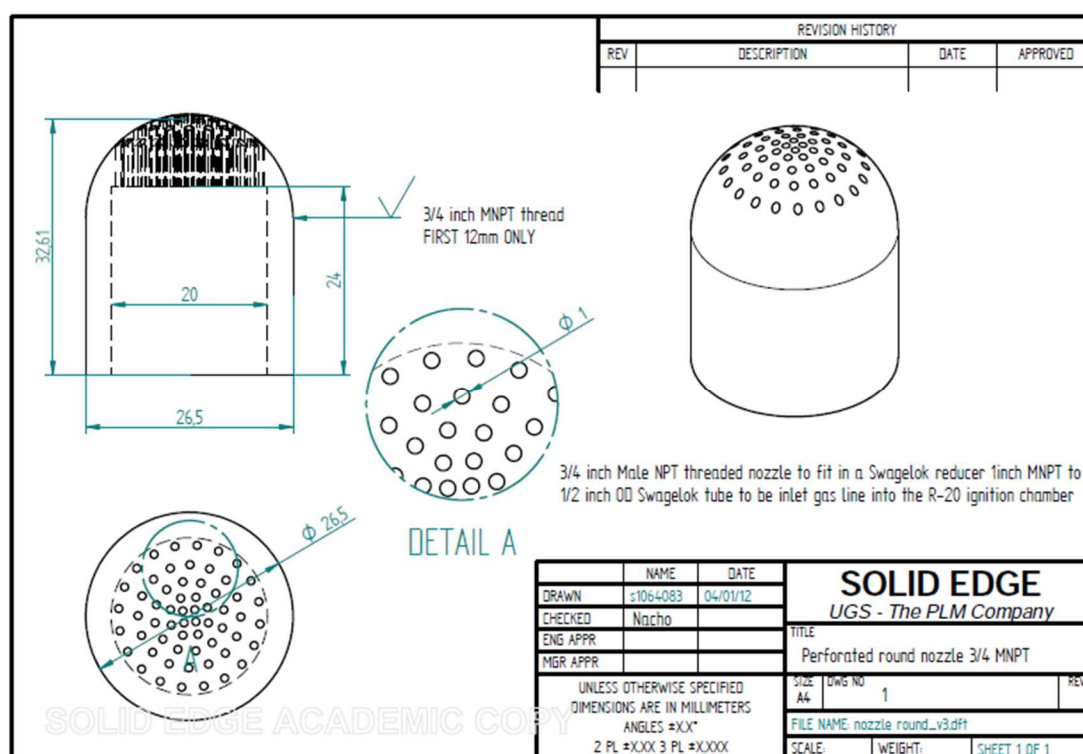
Drawings for perforated round nozzle ¾ inch MNPT.
